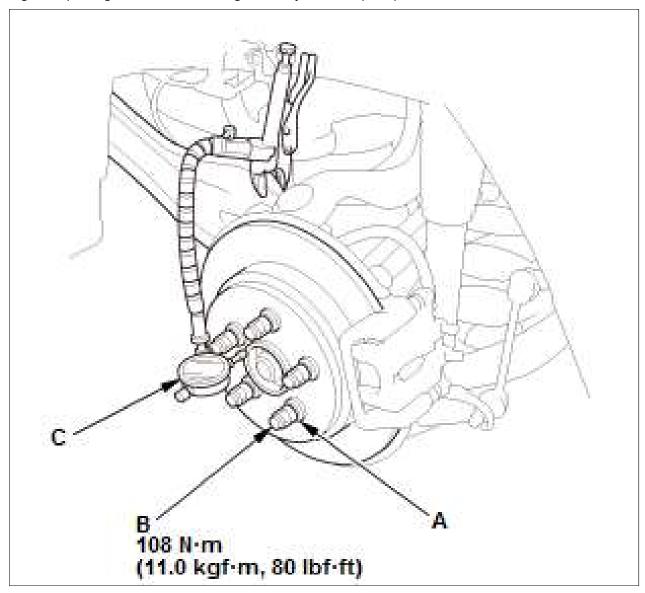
Inspecting Rear Wheel Bearing End Play With Torque Specifications
